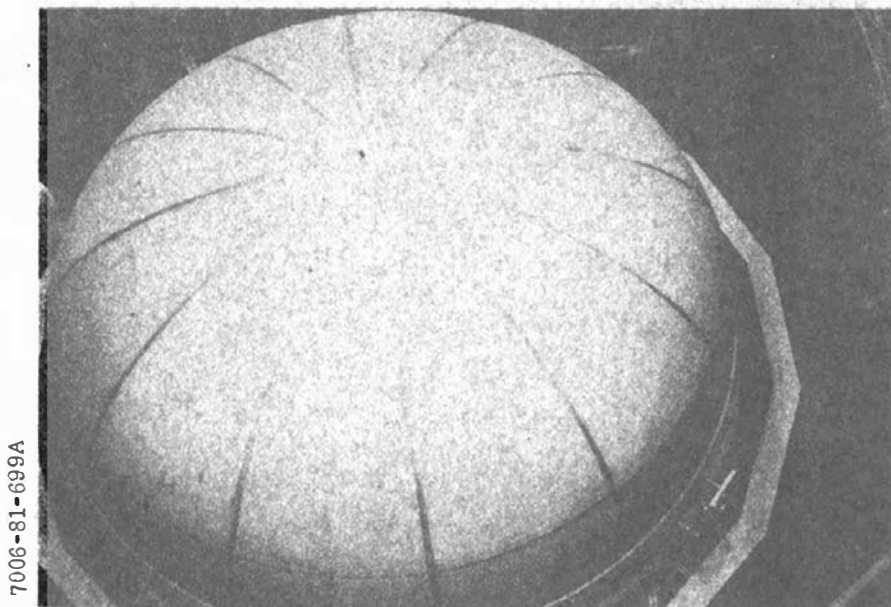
Common Bulkhead Aft Facing Sheet Assembly
